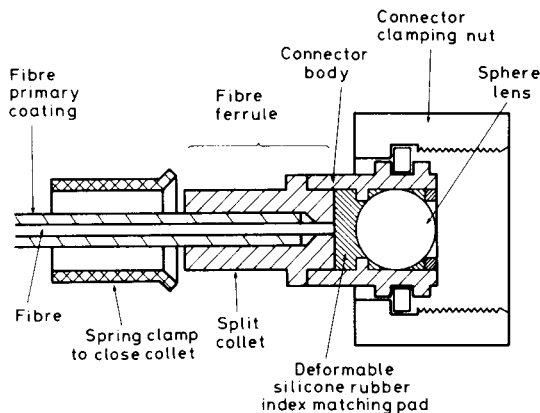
Exploded view of expanded-beam connector incorporating a sphere lens.
